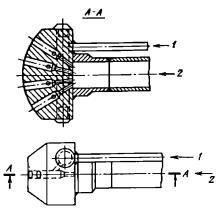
Head of a flat-flame burner I—fuel oil inlet; 2 - steam inlet
